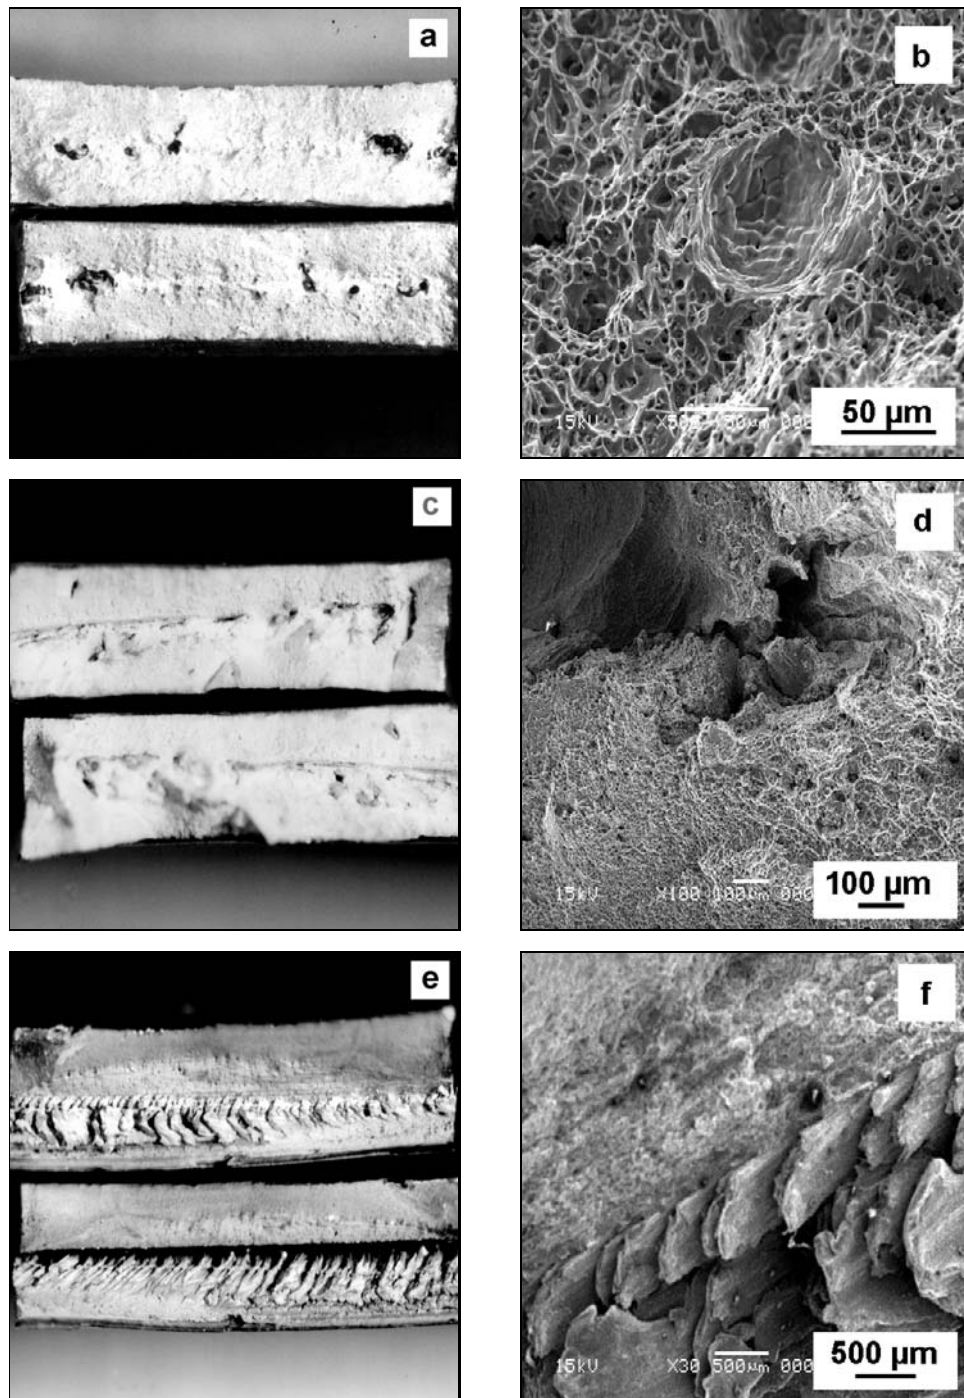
Light macrographs and SEM images of the fracture surfaces of the welded specimens: light macrograph (a) and SEM photo (b) of MIG welded joint, light macrograph (c) and SEM photo (d) of TIG welded joint, light macrograph (e) and SEM photo (f) of FS welded joint.
